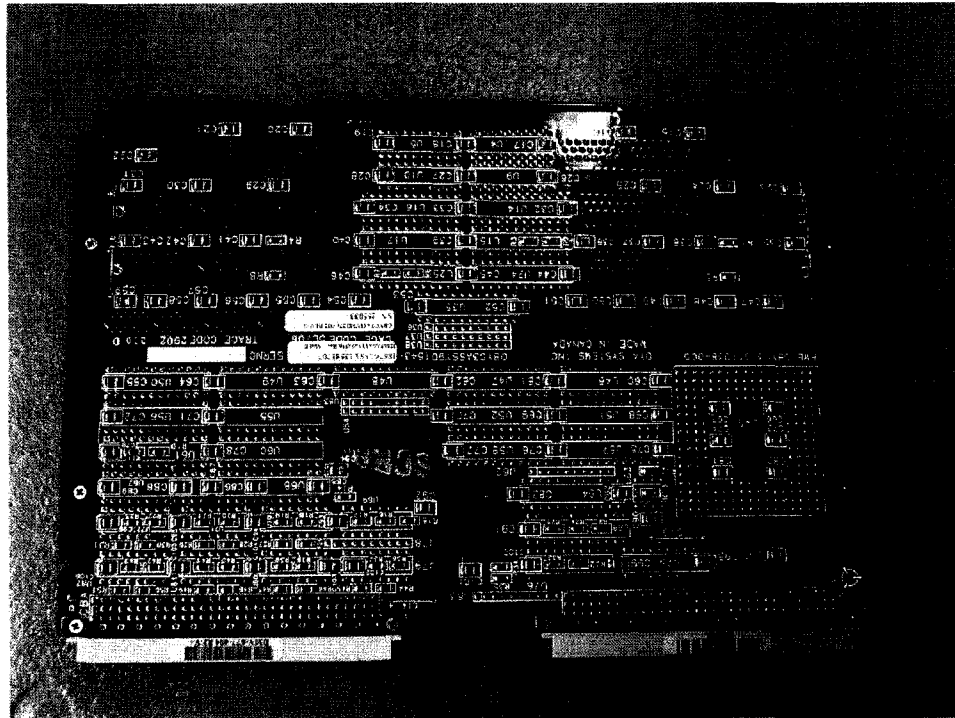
CCA Utilizing Combined Heat Ladder and PWB Core Cooling Scheme (Solder Side)
